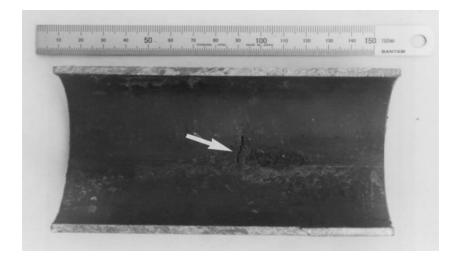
Pitting and Cracking on the Internal Surface of the Tube (A.M. Heyes, 1999)
